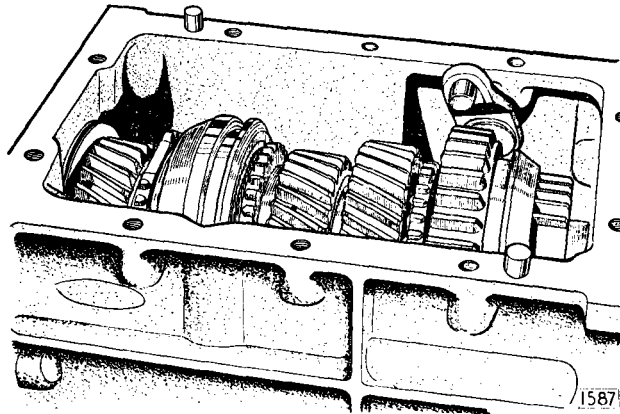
The gearbox top cover removed showing the layout of the mainshaft gears.
